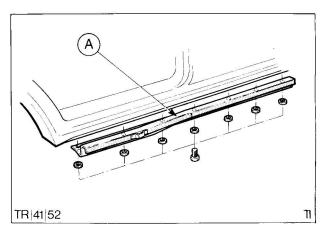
Lower guide rail and striker assembly A – Guide rail
